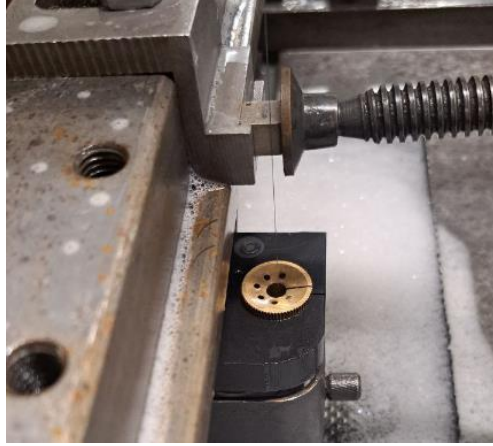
cutting the samples via Wire Electrical Discharge Machining
